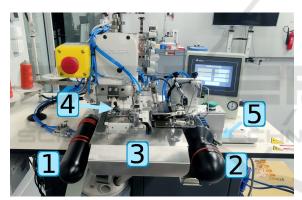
Automatic sewing machine (SiRUBA ASC-TBH200). Numbered in blue, the components are: left cylinder that extends to the left side when a T-shirt is detected (1), right cylinder with guiding wheels to rotate the T-shirt (2), guiding platform that keeps the T-shirt straight between the cylinders (3), presser foot and needles of the sewing machine (4), T-shirt detection sensor (5).
